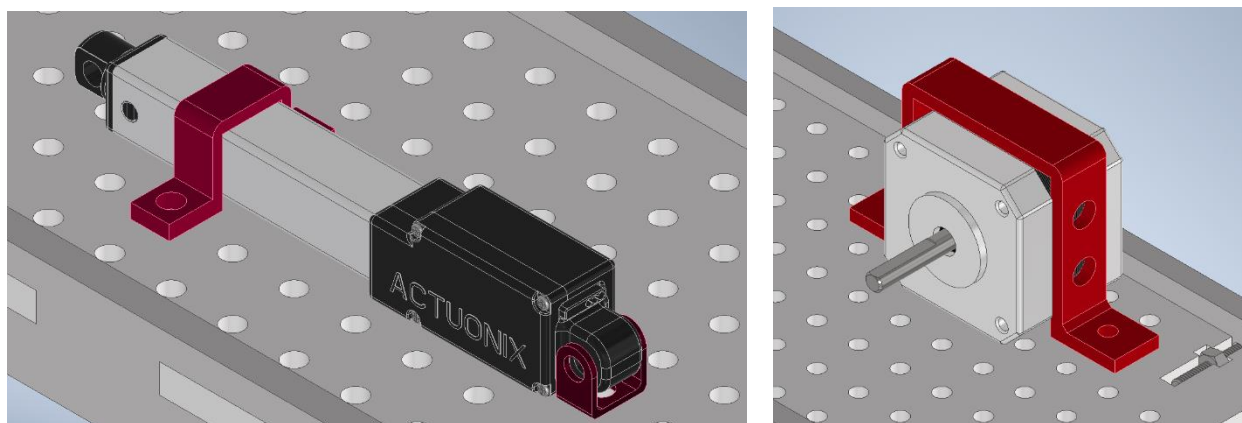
In the design of your mechanism, you may choose whether your input is driven by a linear actuator (left) or rotary actuator (right). Highlighted in red are parts given to you to mount each actuator to the baseplate. For a detailed description of these parts, see the Provided Parts Documentation file.
